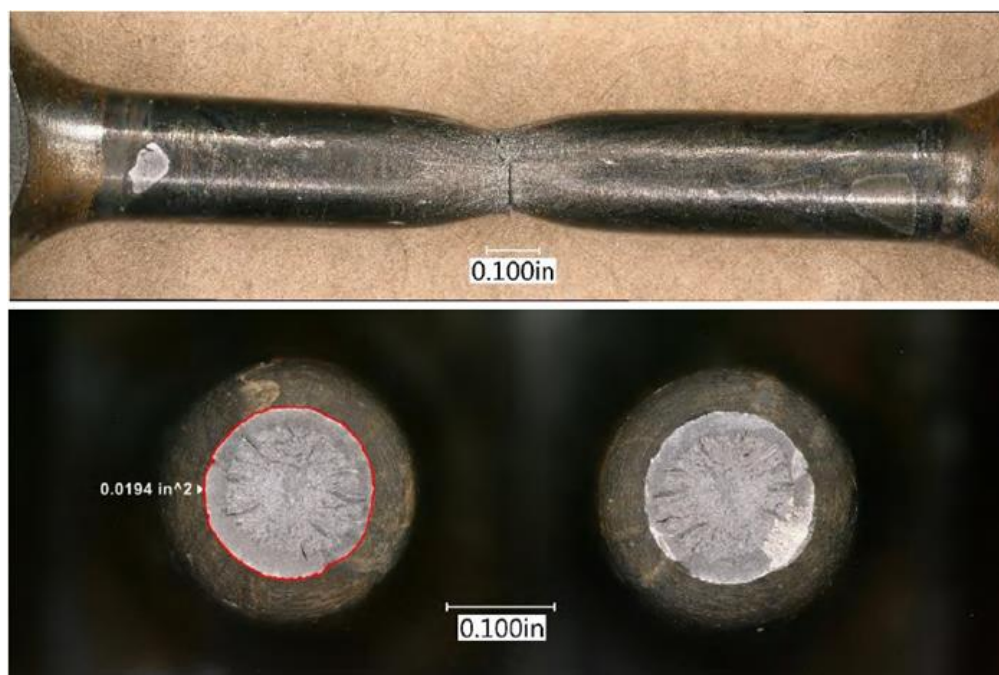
Photographs of Tested Tension Test Specimen QW-16 and Corresponding Fracture Surfaces – Weld Metal, Wire Heat 5P6771/Flux Lot 0342, 250°F
